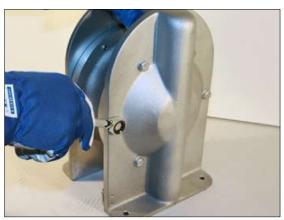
Mount the centerblock assembly on one of the housings (11). Position the in/outlets (13) and o-ring/gasket (18) while the housing is laying on the side. Carefully put on the other housing (11). Tighten the screws (37) eqaully, recommended tightening torque you find in chapter 5.5.
